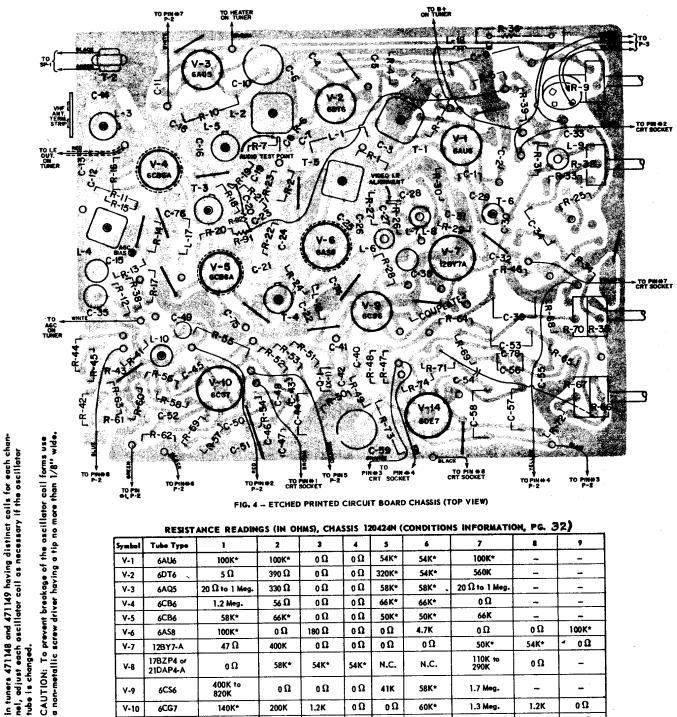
ETCHED PRINTED CIRCUIT BOARD CHASSIS (TOP VIEW)
